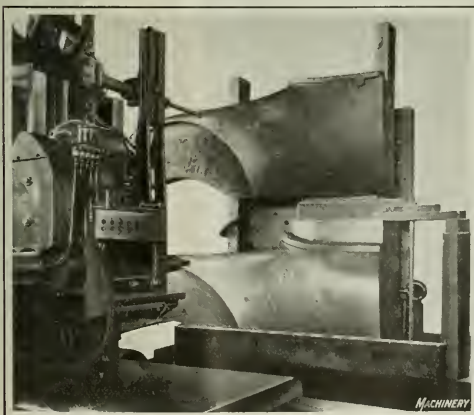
Machining a Large Die on an Automatic Die-sinking Machine
